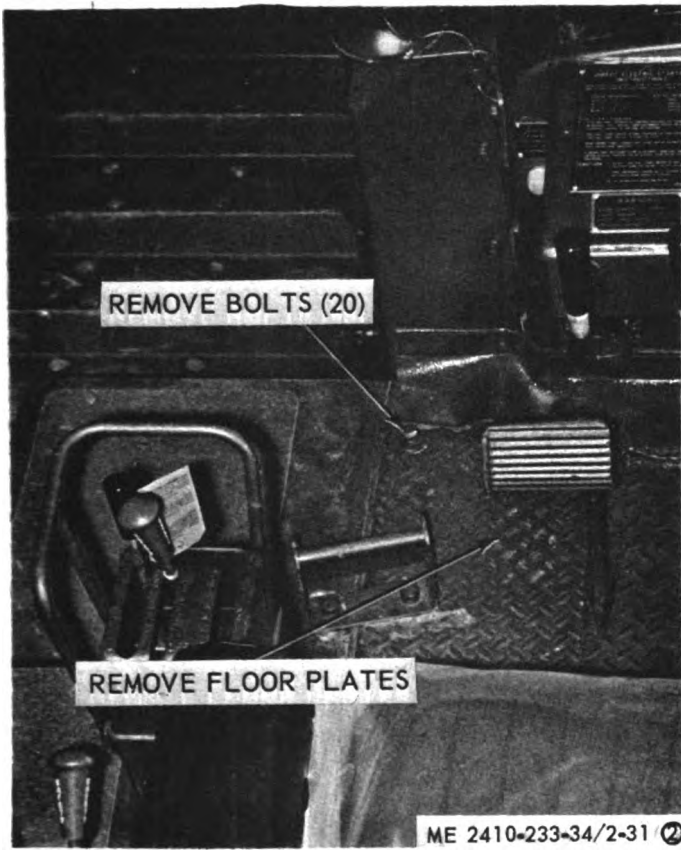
Preparing to remove engine (sheet 2 of 6).
